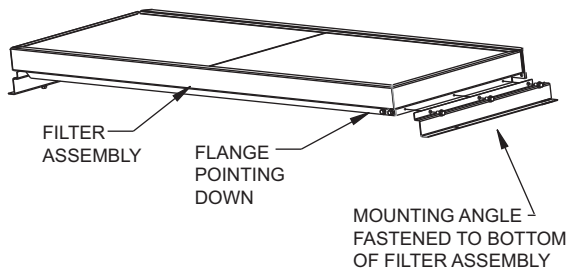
Correctly Assembled Bottom Filter Assembly (Sizes 20-35 Only)
